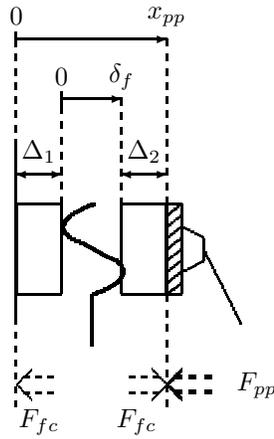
A zoom of the axial displacement of the flat spring and forces on the friction surfaces: $\delta_f = \Delta_f$ when the clutch is open and $\delta_f = 0$ when the clutch is closed.
